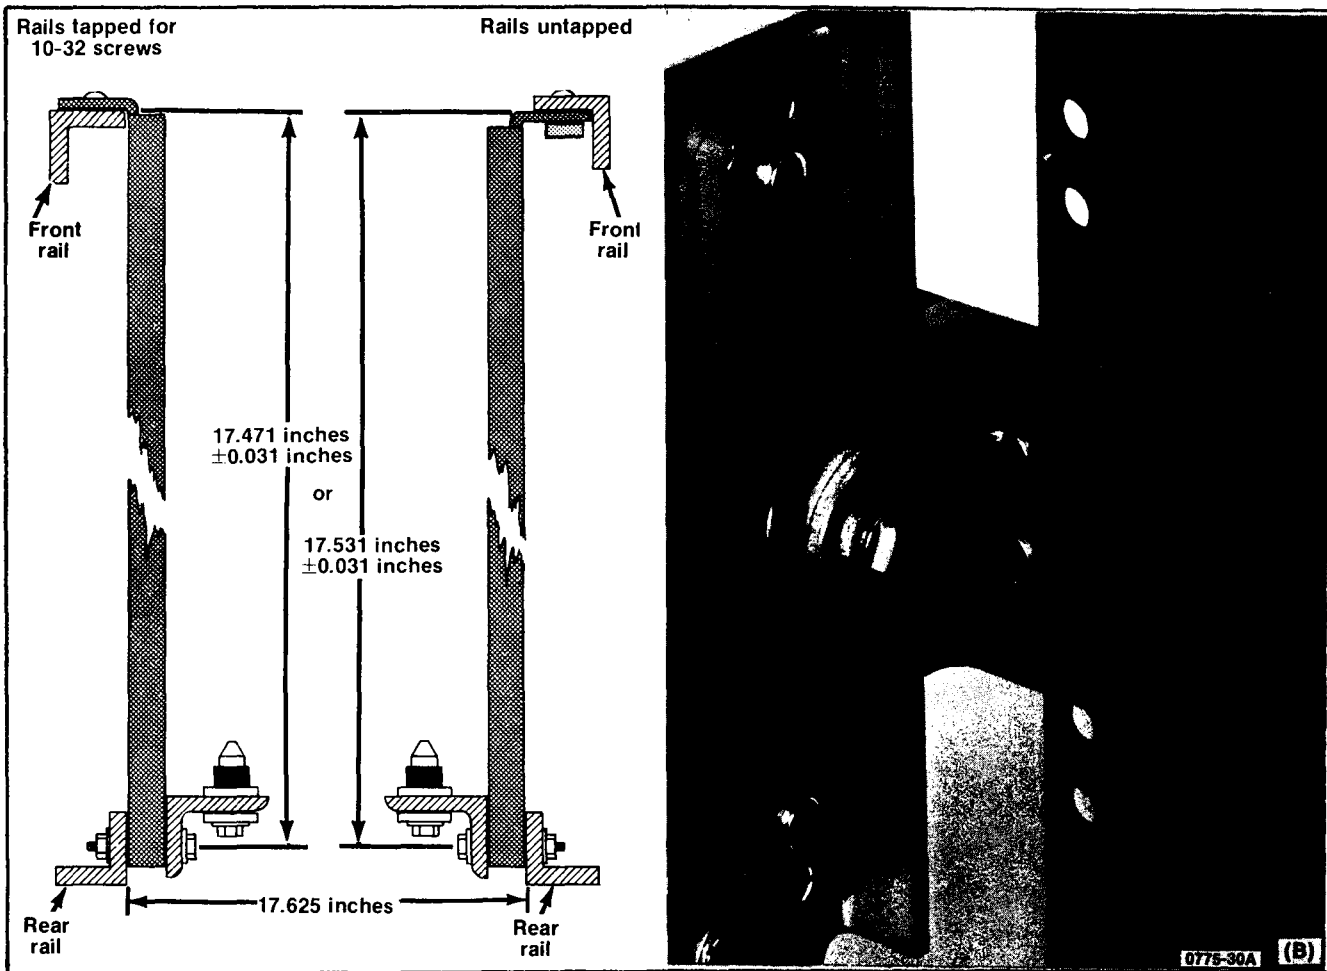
Supporting the rear of the stationary sections: (A) Dimensions necessary; (B) Completed installation.
